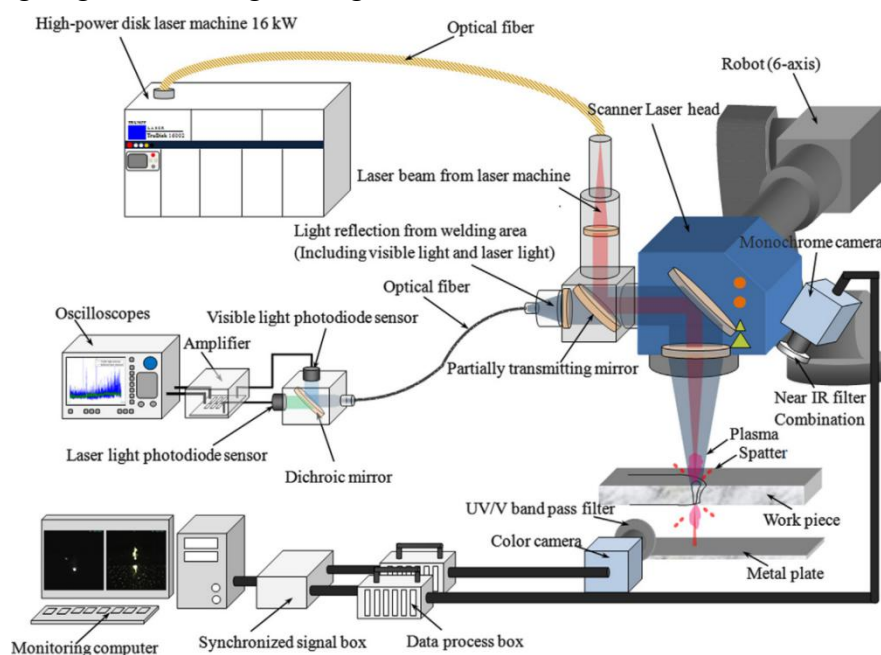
Schematic of multiple optics sensing of disk laser welding [90].
